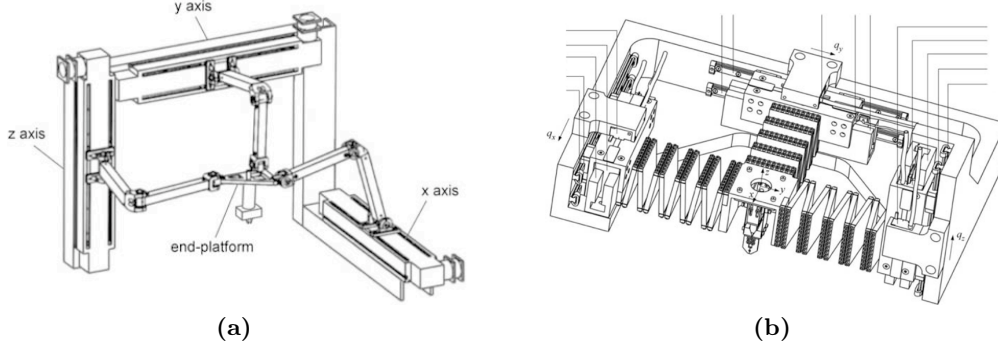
Example of a parallel cartesian mechanism (a) and MiniPaR prototype (b).
